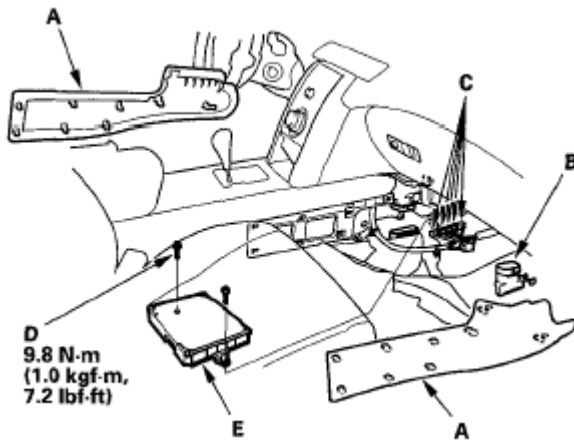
Identifying Panels, PCM Connectors, Ducts And Bolts With Torque Specifications
